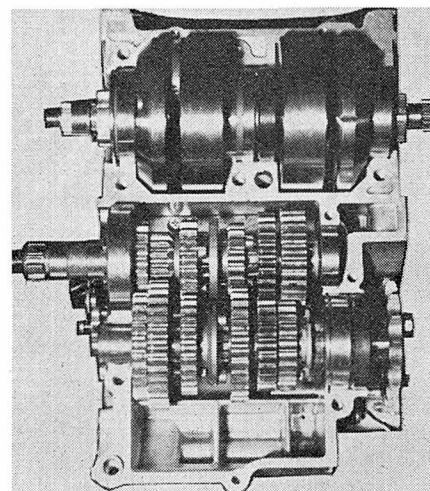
View of upper crankcase with transmission gears and crankshaft in position.
